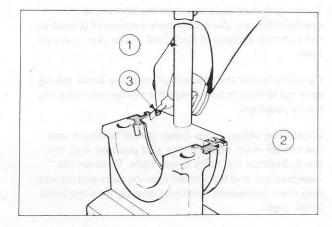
Installing Crankshaft Rear Oil Seal - (Main Bearing Cap Shown)
